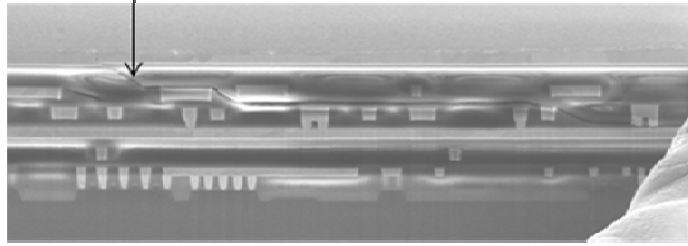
Cracks cutting into the die (Focus-ion-beam image)
